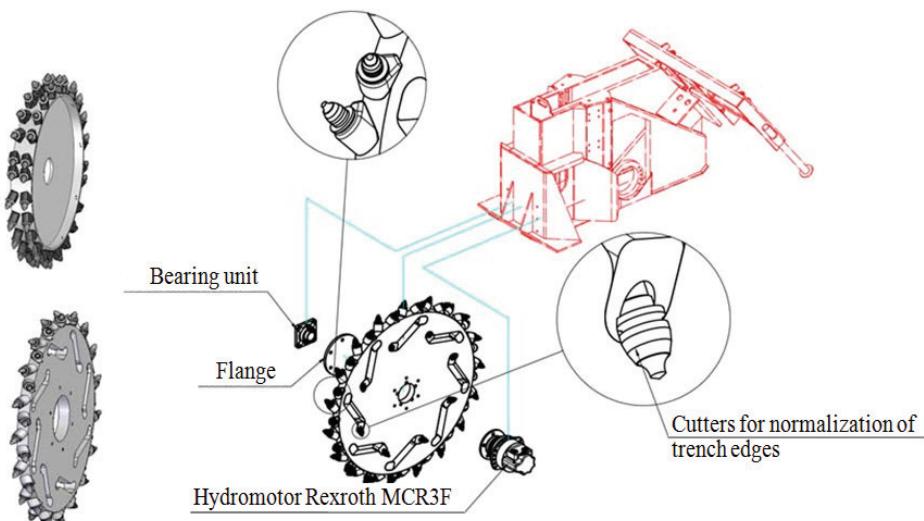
Subassembly of the cutting wheel as an element of the assembly structure
